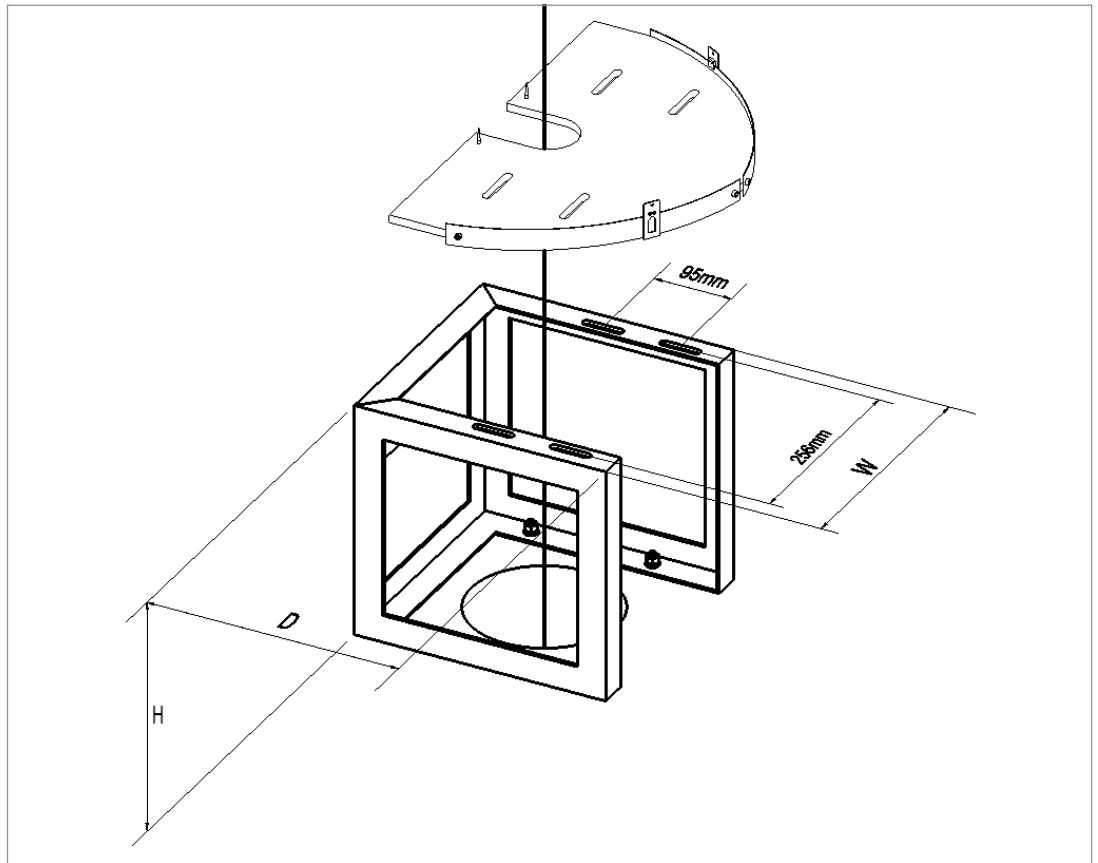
Key Dimensions of the Floor Mounting Bracket
